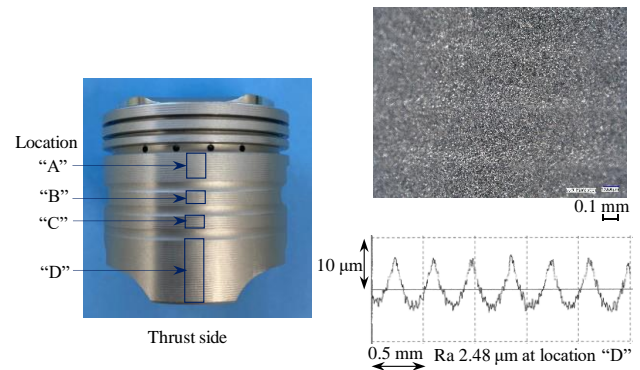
Micro-dimpled piston and surface shape on the piston skirt
